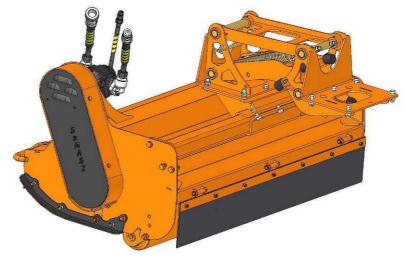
Linkage with mounting for Lama 121 / 141 mowing head
